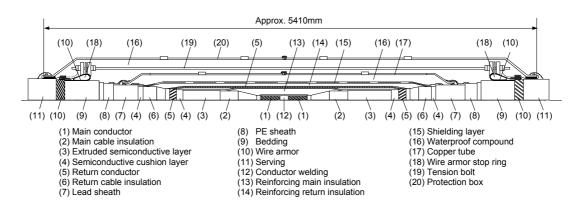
Schematic of repair joint for +/- 250kV/180MW HVDC coaxial extruded cable
